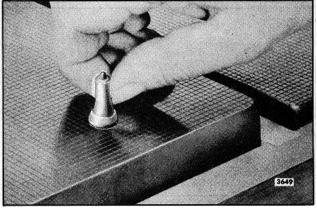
Lapping Spray Tip on Lapping Blocks J 22090
